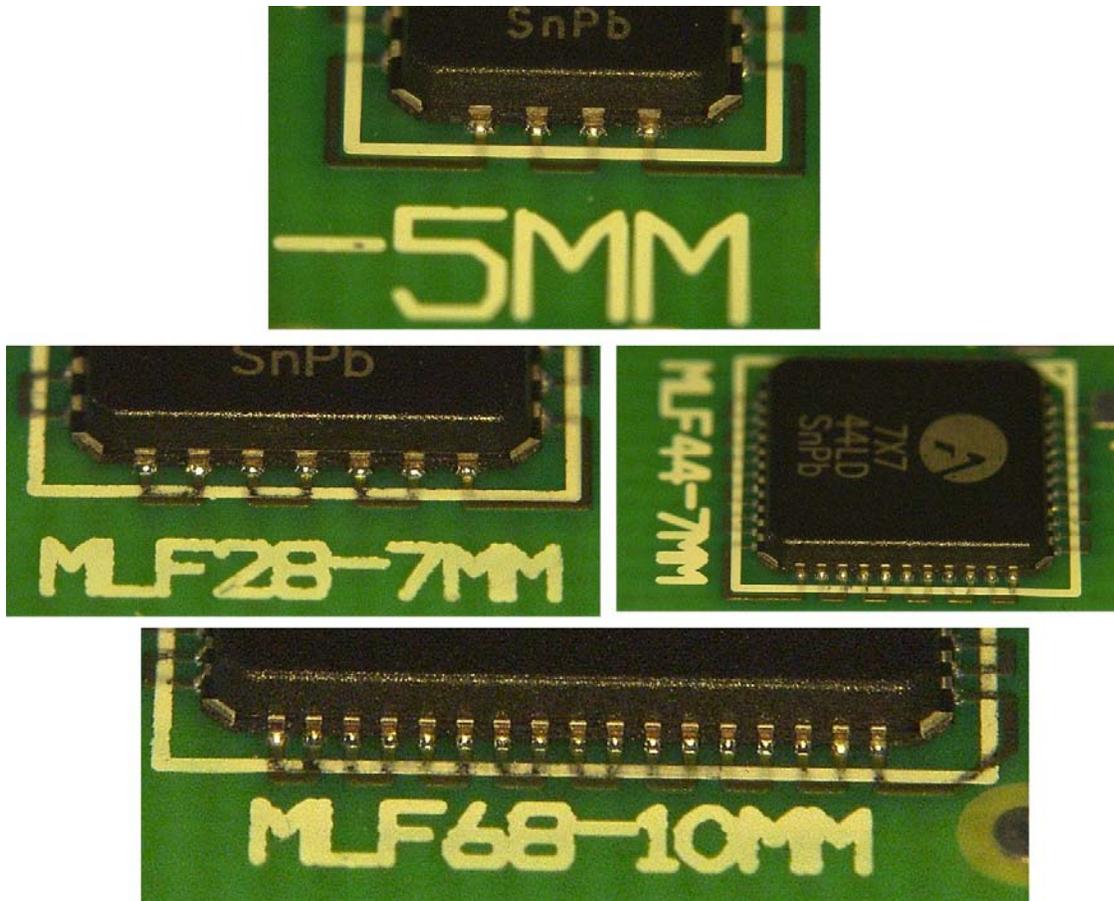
Representative of the optical images of various QFN parts including MLF16-5mm², MLF28-7mm², MLF44-7mm², and MLF68-10mm².
